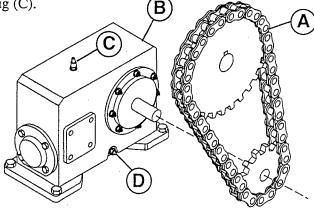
Conveyor Gearbox and Drive Chain Lubrication
